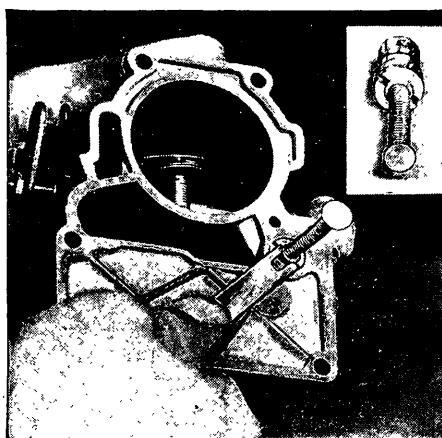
With tool T-24733 assemble vacuum piston. Do not lubricate piston or its cylinder. Hold tool flat against gasket surface to avoid damage to part or tool
